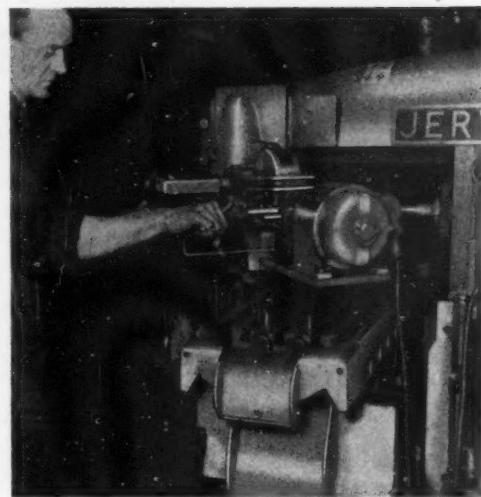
With this Attachment on a Jerwag Horizontal Miller, the Operator Performs a Countersinking and De-burring Operation During the Automatic Cycle of the Machine
